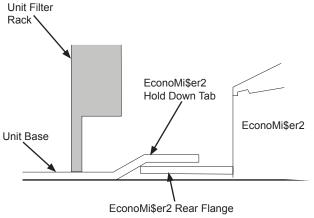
Rear EconoMi\$er2 Flange Installation (Small and Large Cabinet)
